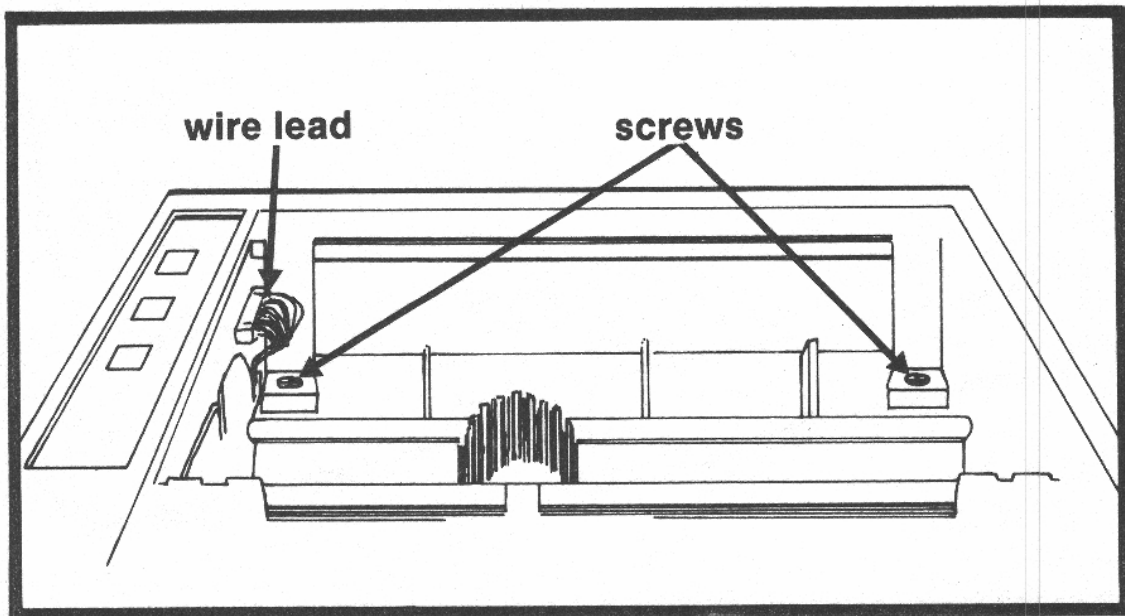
Location of screws attaching upper case and wire lead to the control panel
